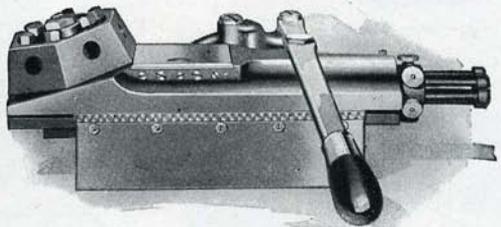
Semi-Automatic Bed Turret, Hand Lever Type. Cat. No. 1509. Price.....\$210.00
